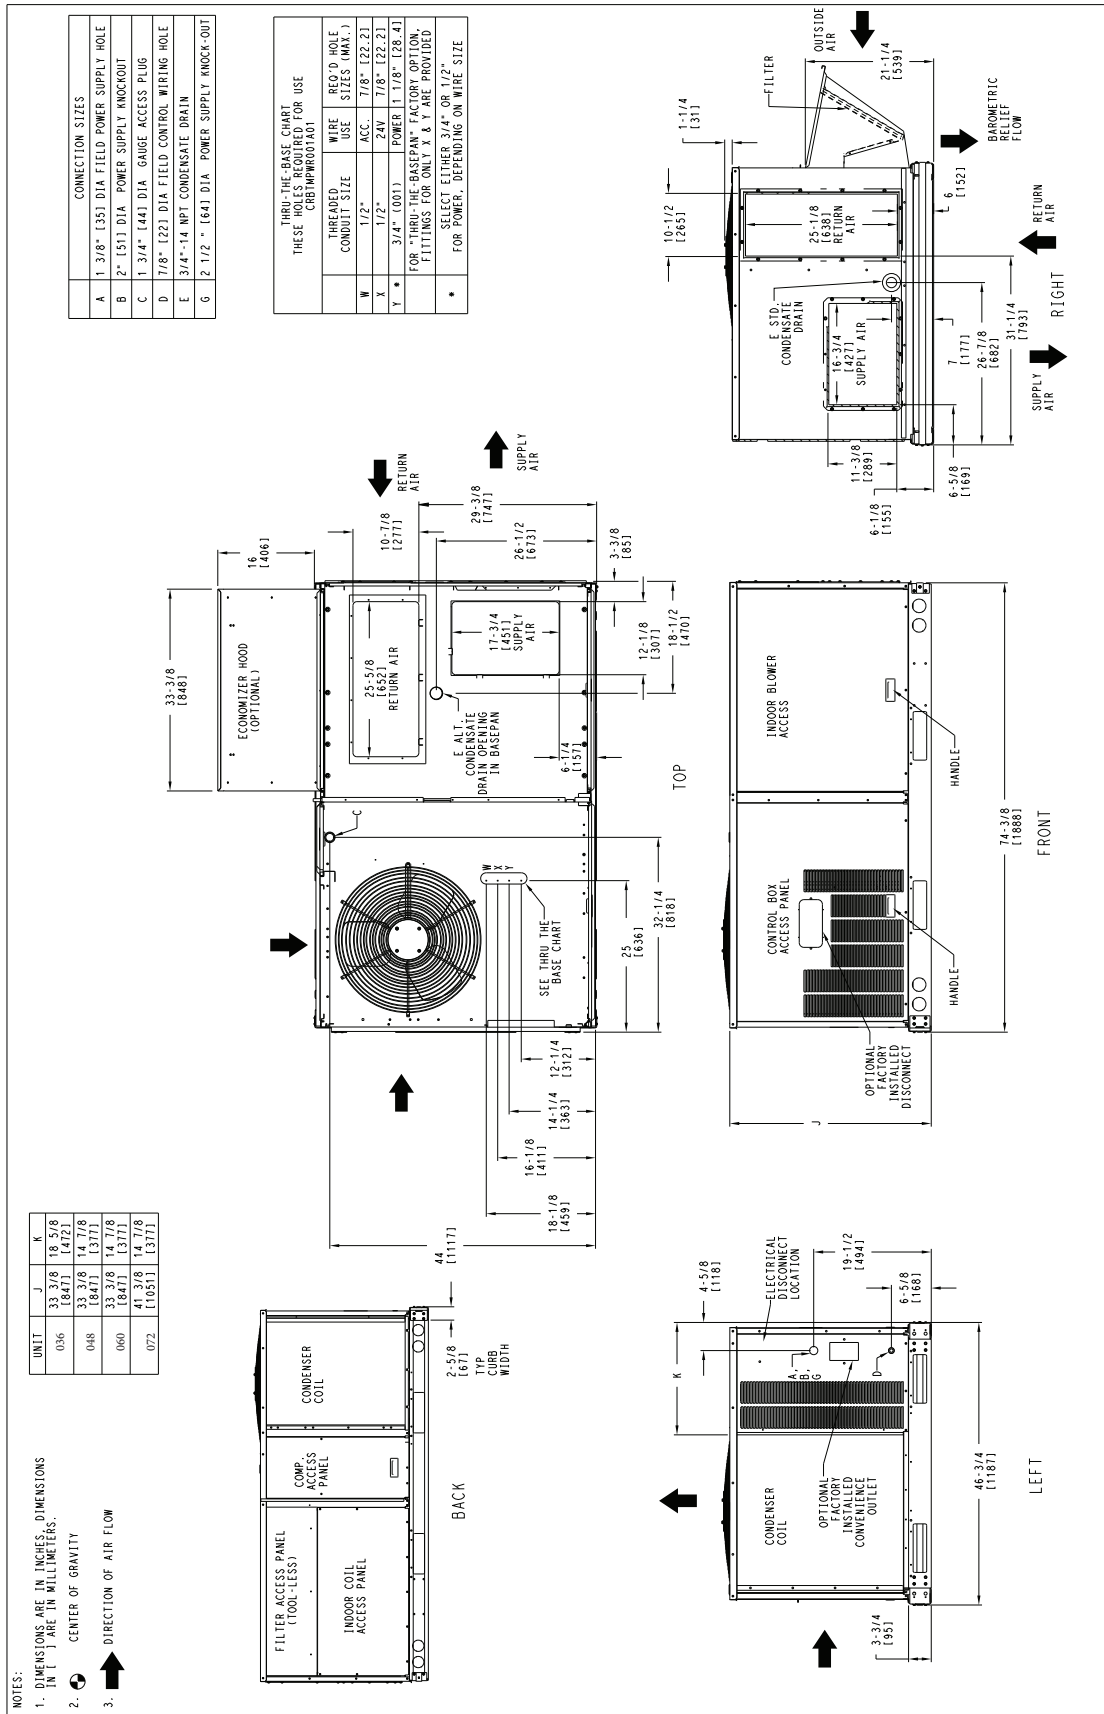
Dimensions RAS 036-072 (Sheet 1 of 2)
